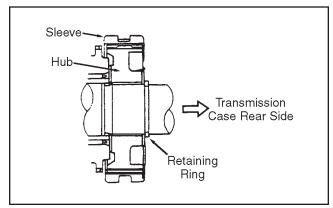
H-31. Main Shaft Assembly — Steps 8 and 9
